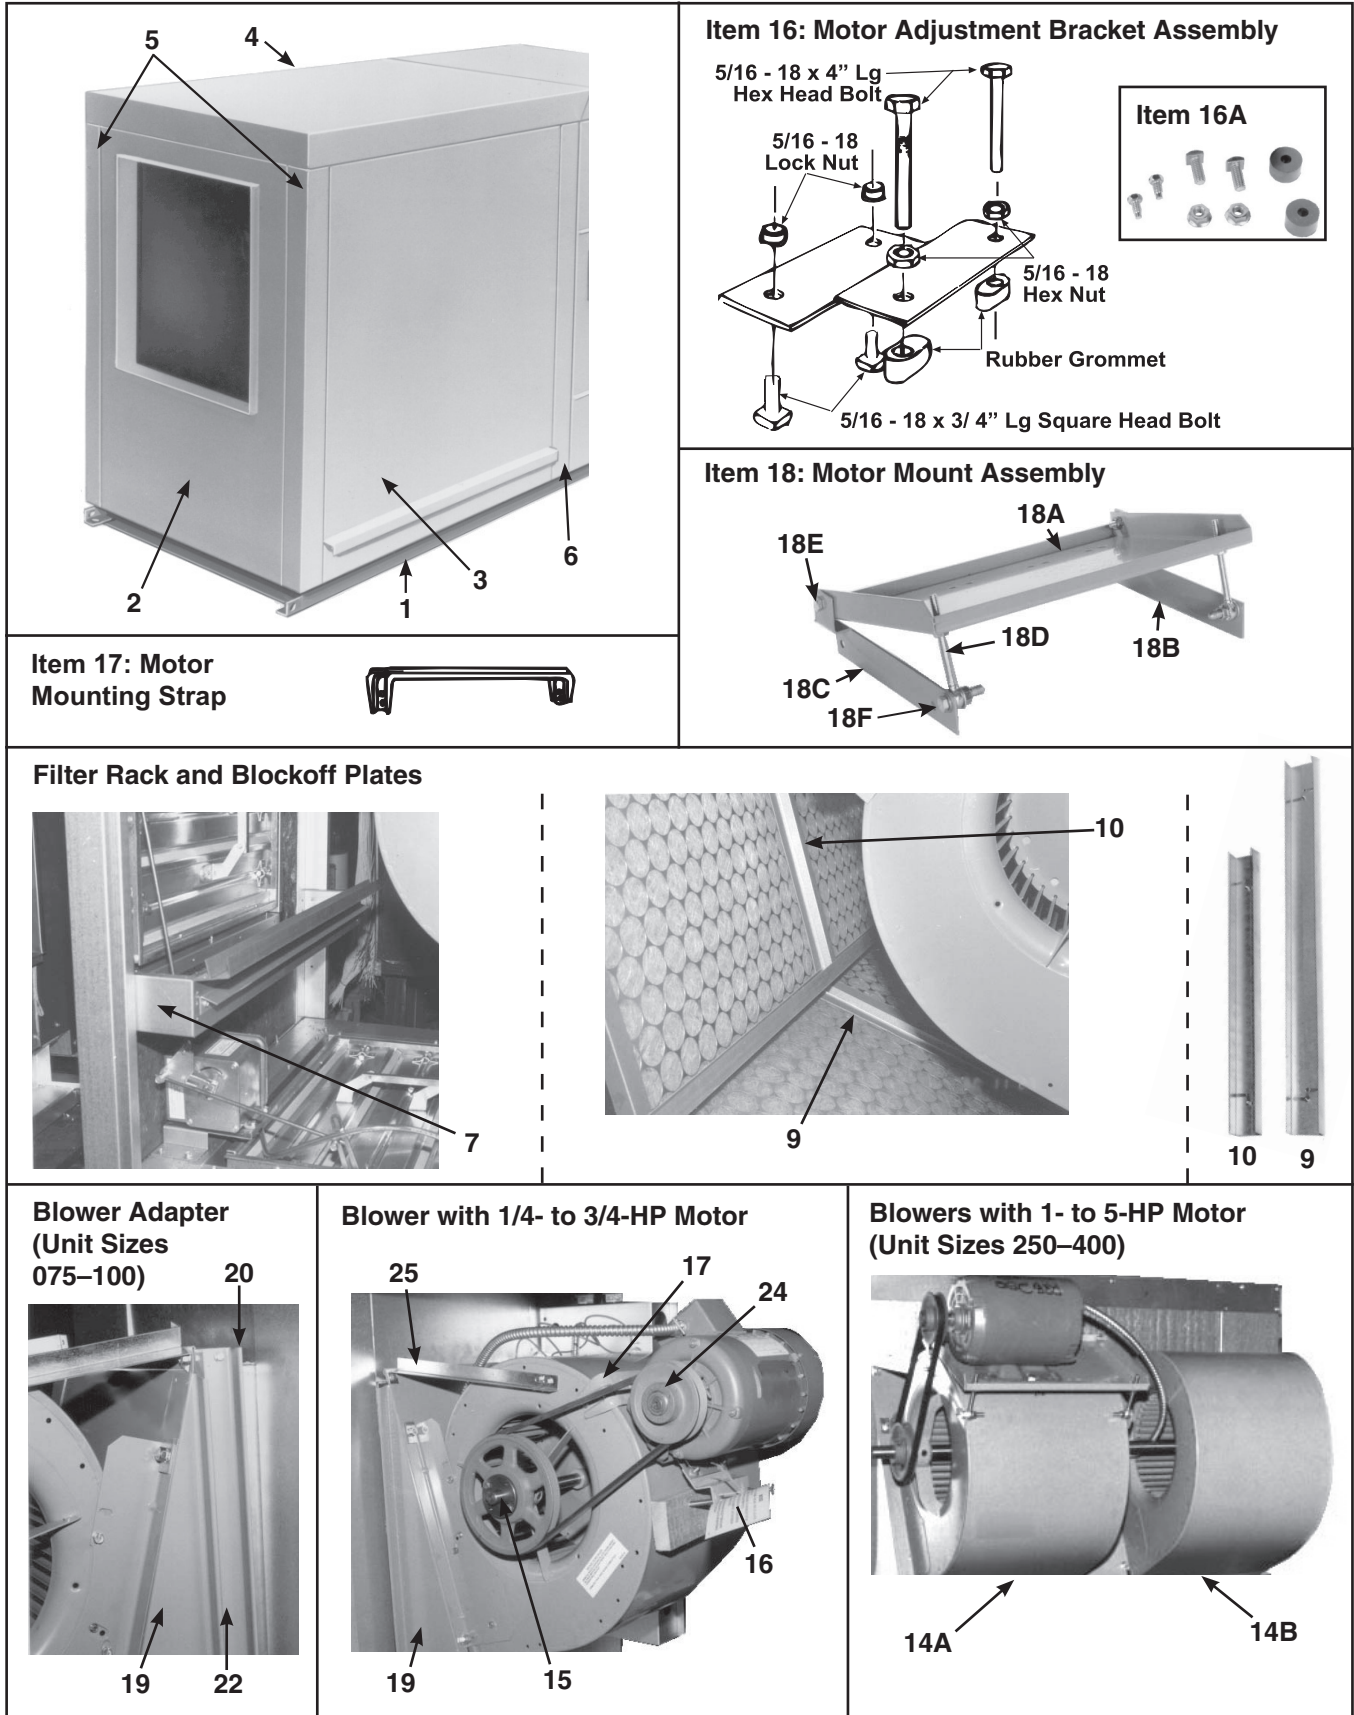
RGB and RPB Model B-Type Blower Cabinet Section Components (Refer to Table 46)
